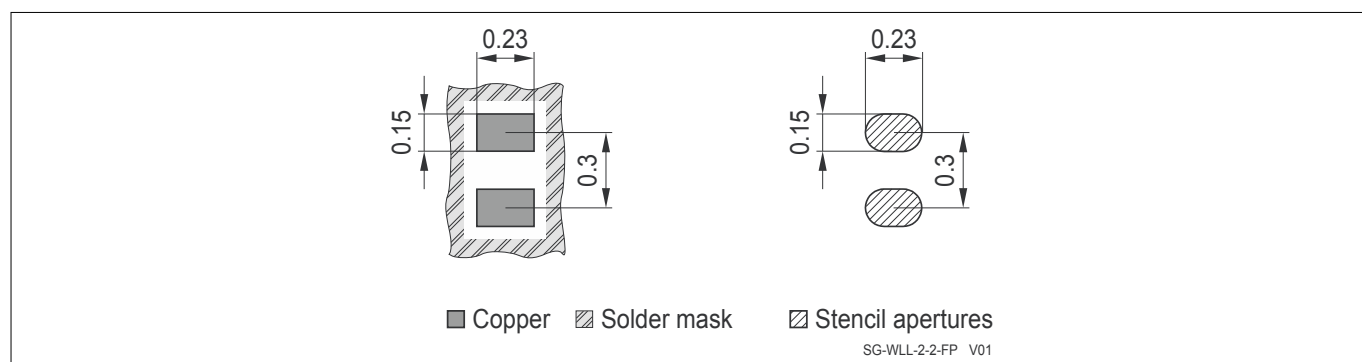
WLL-2-2 footprint (recommendation for Printed Circuit Board assembly see [2])
